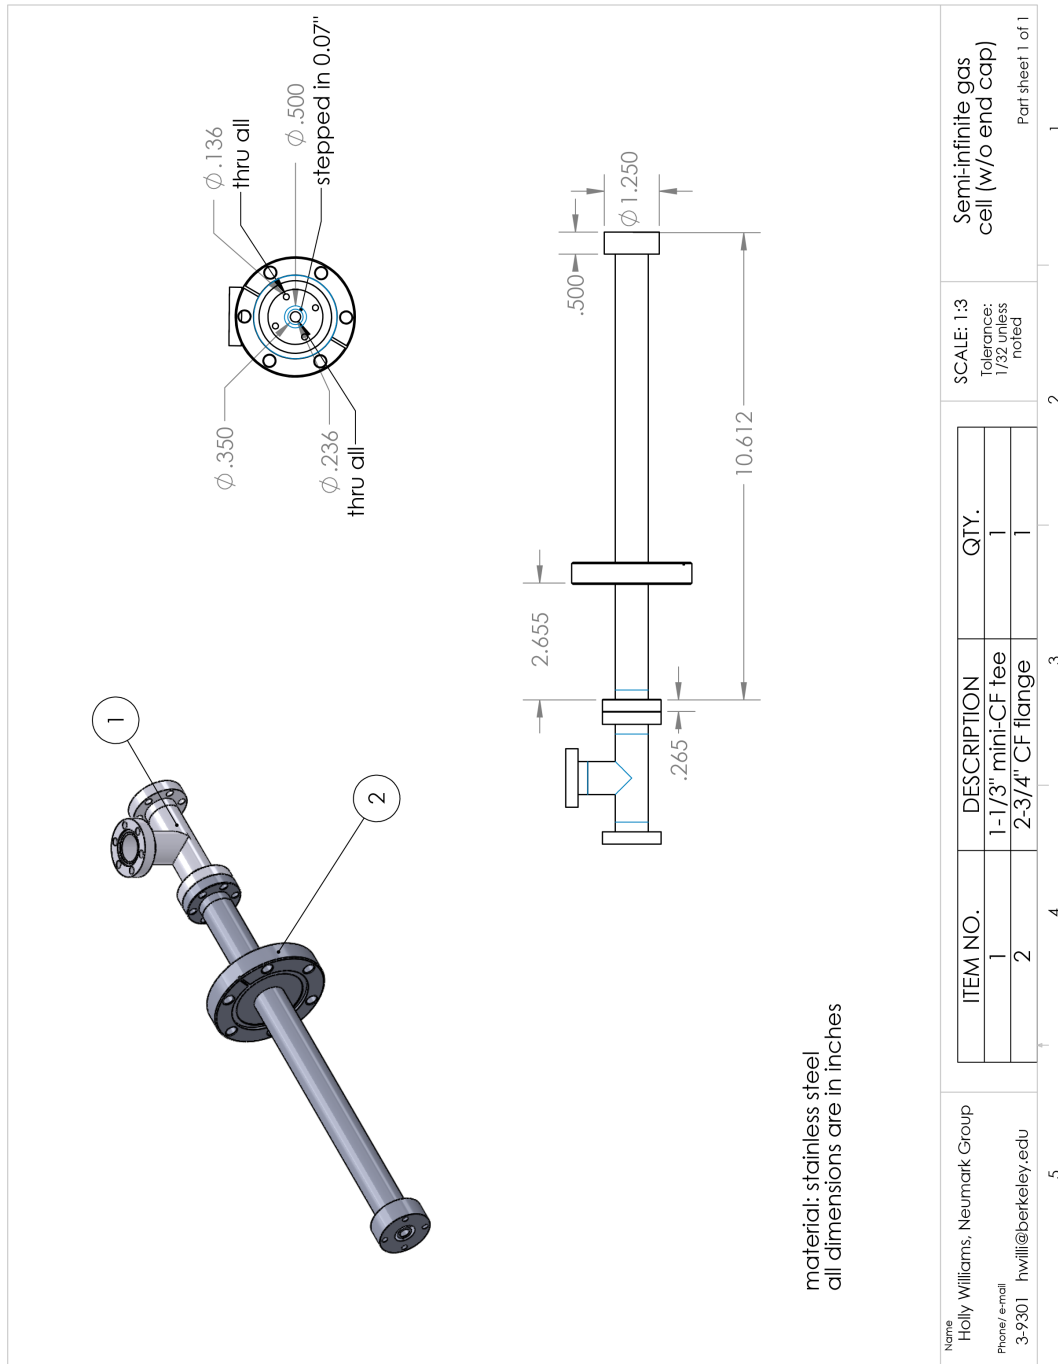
SIGC machine drawing. The 1-1/3" mini-CF tee was purchased and used as is, and the 2-3/4" CF flange is rotatable. The end cap is pictured in Figure C.3. The cap is made from stainless steel (304 SS).
